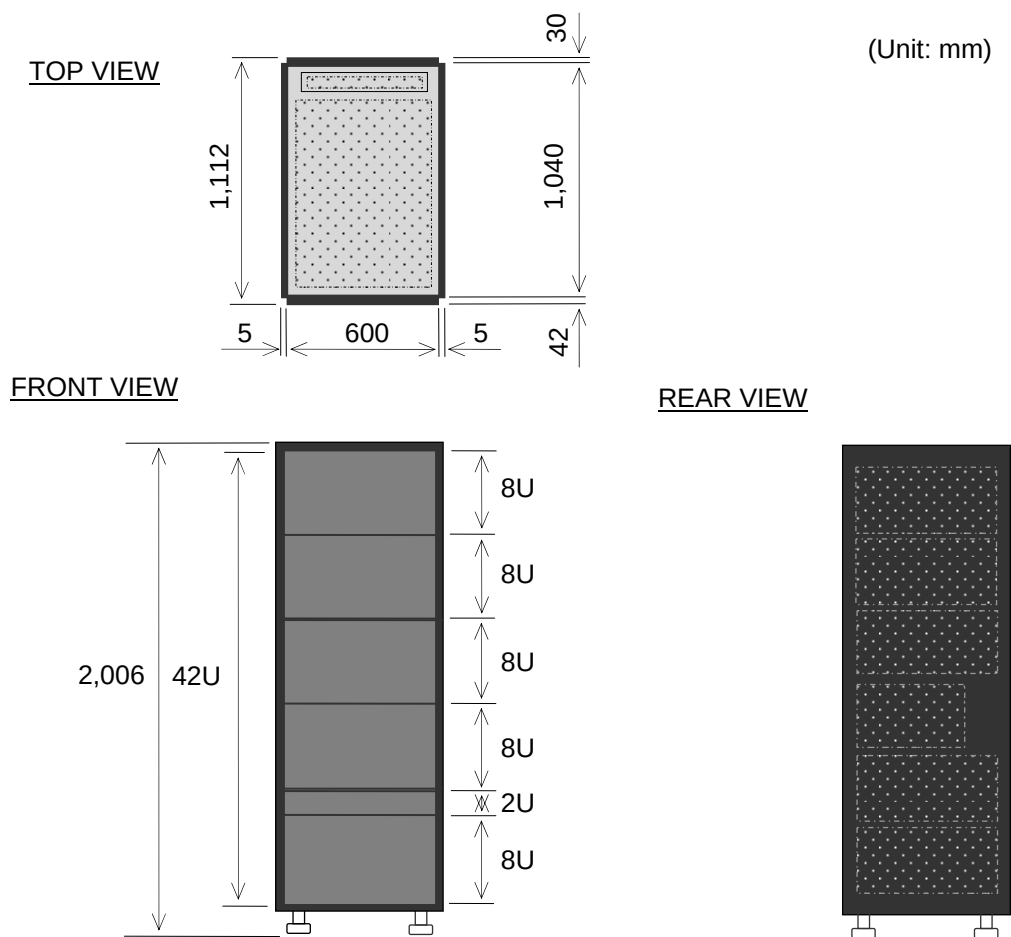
Physical Dimensions of the DKC Rack
